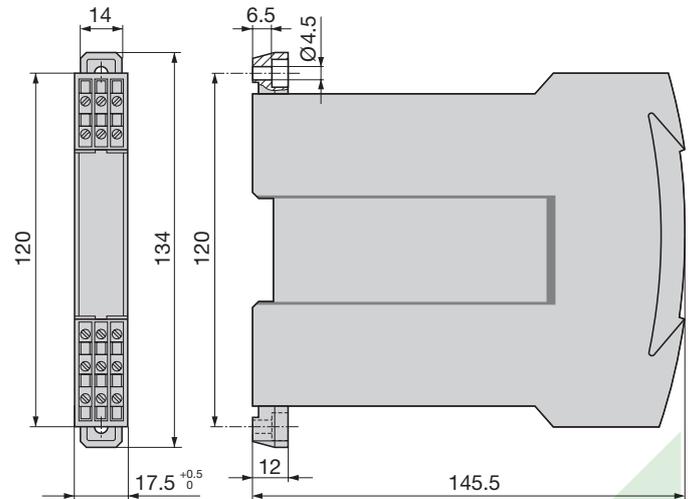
SINEAX C 402-1 in housing S17, screw hole mounting brackets pulled out.
